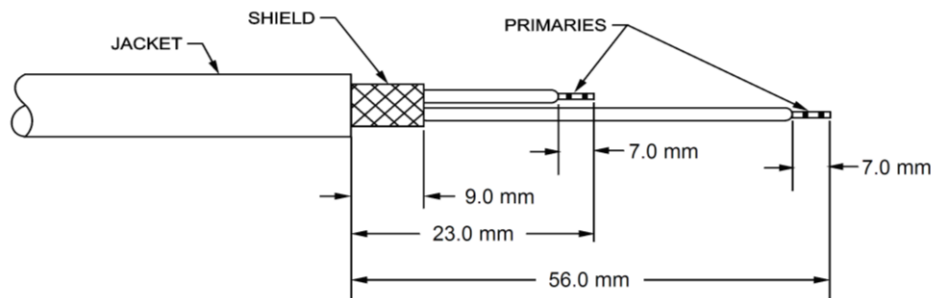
Single Shield Cable Strip Dimensions for Mini-Seal Crimp
